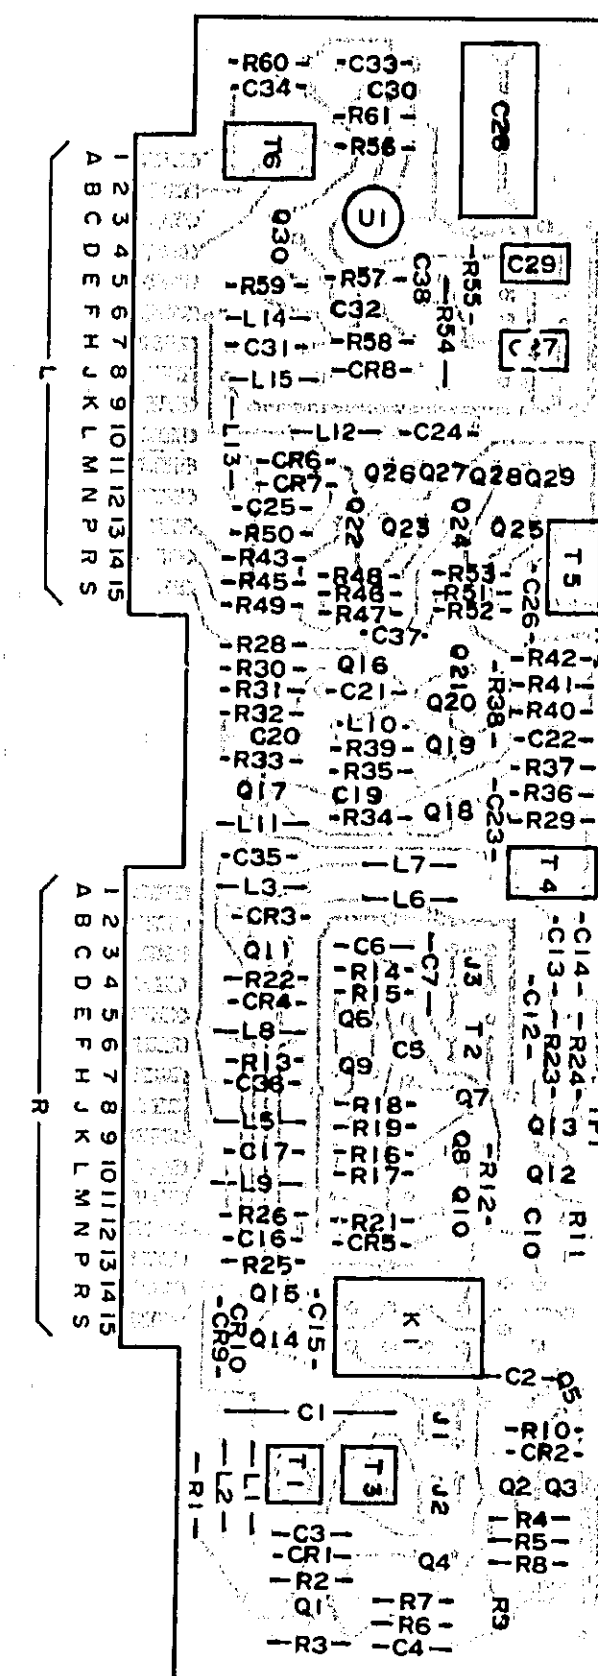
A10 Buffer &amp; Cs, Gs Amplifier Board Assembly Component Locations.
